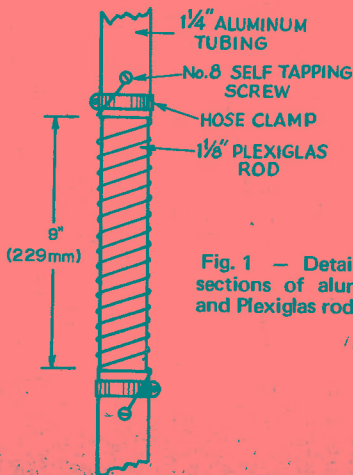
Details for joining sections of aluminum tubing and Plexiglas rod.
